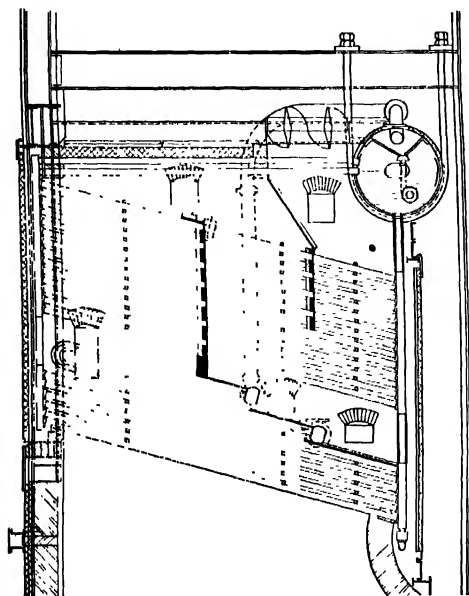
Babcock and Wilcox Superheater — Located Between Tube Sections.
